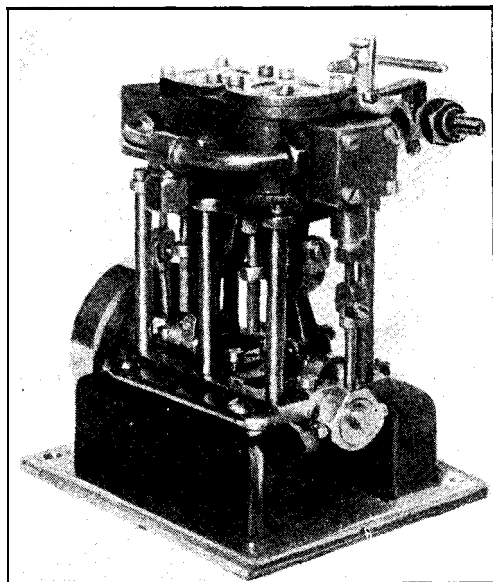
The Twin-Cylinder Launch Engine ; Starboard Side.
